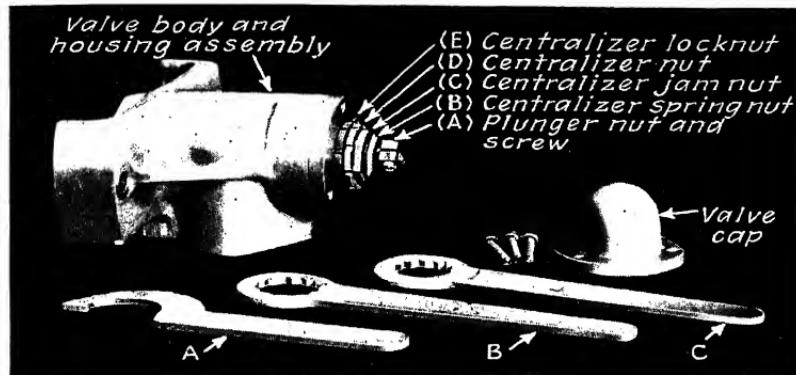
Balanced oil valve with cap removed and tools to be used.
